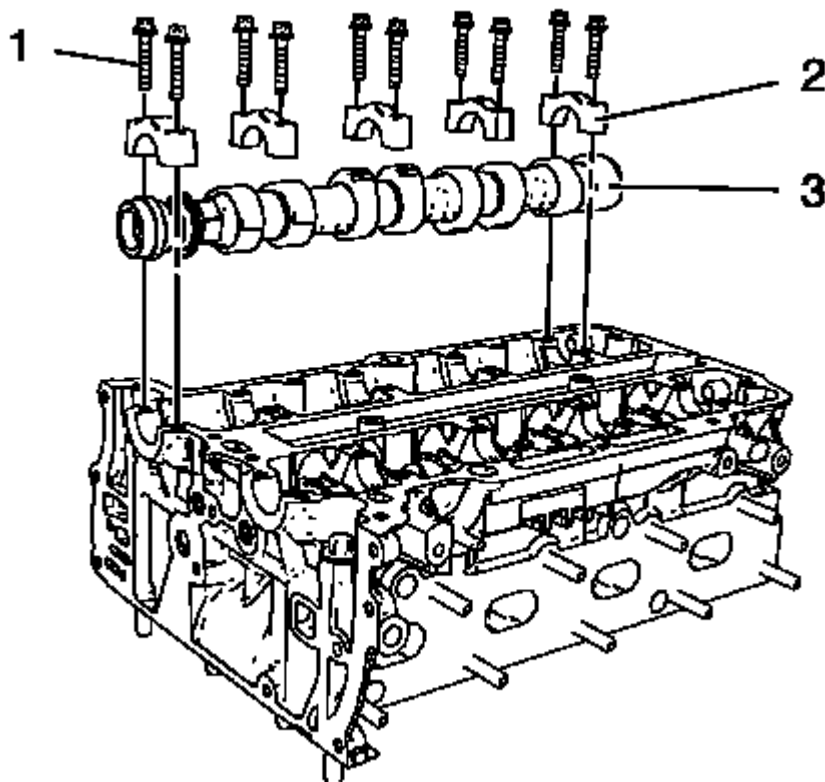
Intake Camshaft, Camshaft Bearing Caps And Bolts
